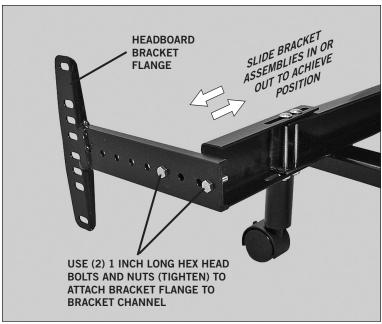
Headboard bracket flange installation (attach one flange to each of the headboard bracket channels).
